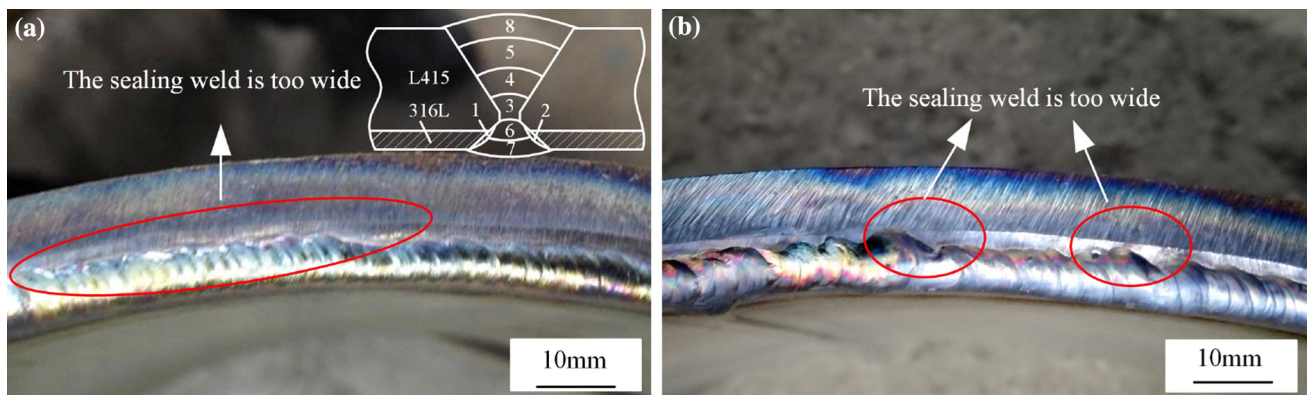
Results of groove C a and b macroscopic morphology of sealing weld
